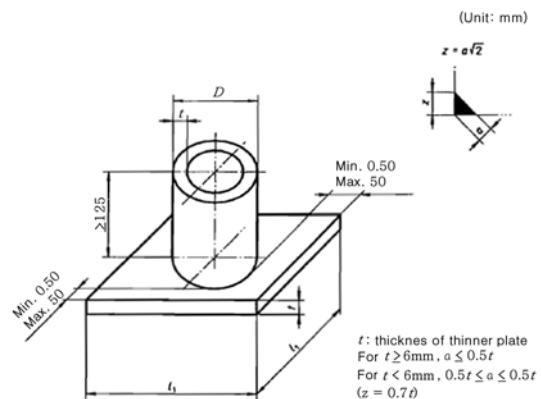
Dimensions and types of test assembly for pipe fillet welds
